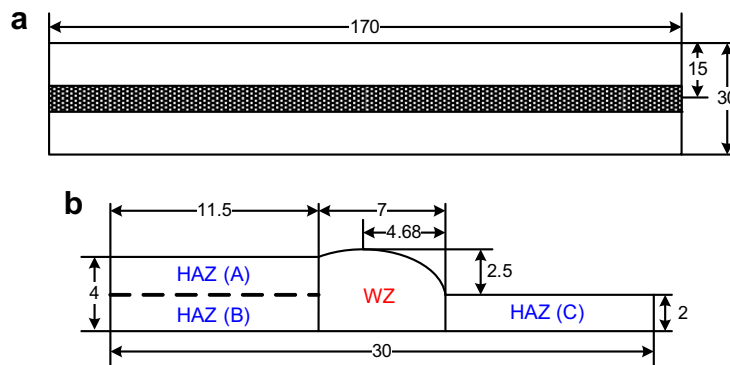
Dimensions of the longitudinal welded specimen for three point bending tests (in mm): (a) top view and (b) cross-section view (enlarged by five times in scale).
